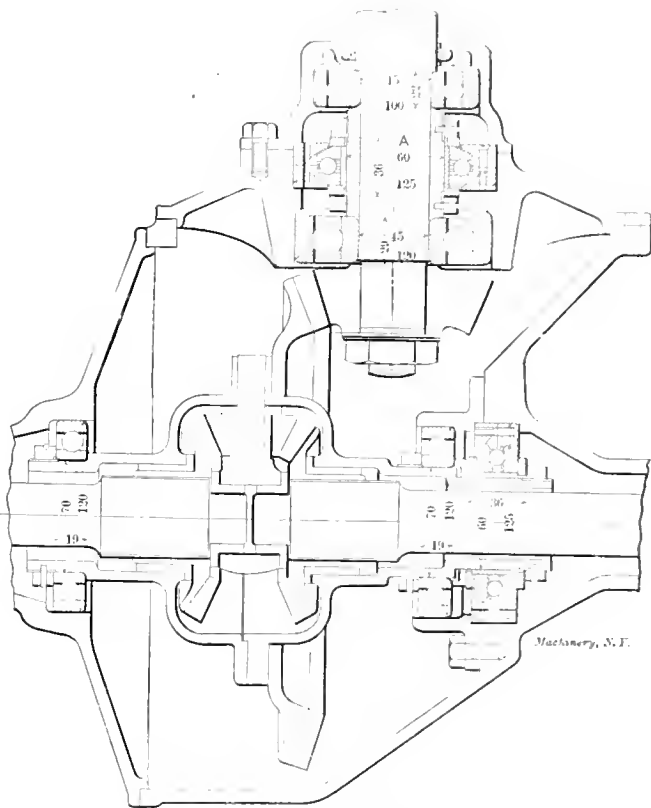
Automobile Rear Axle and Differential Gearing equipped with the Double Thrust Bearing
